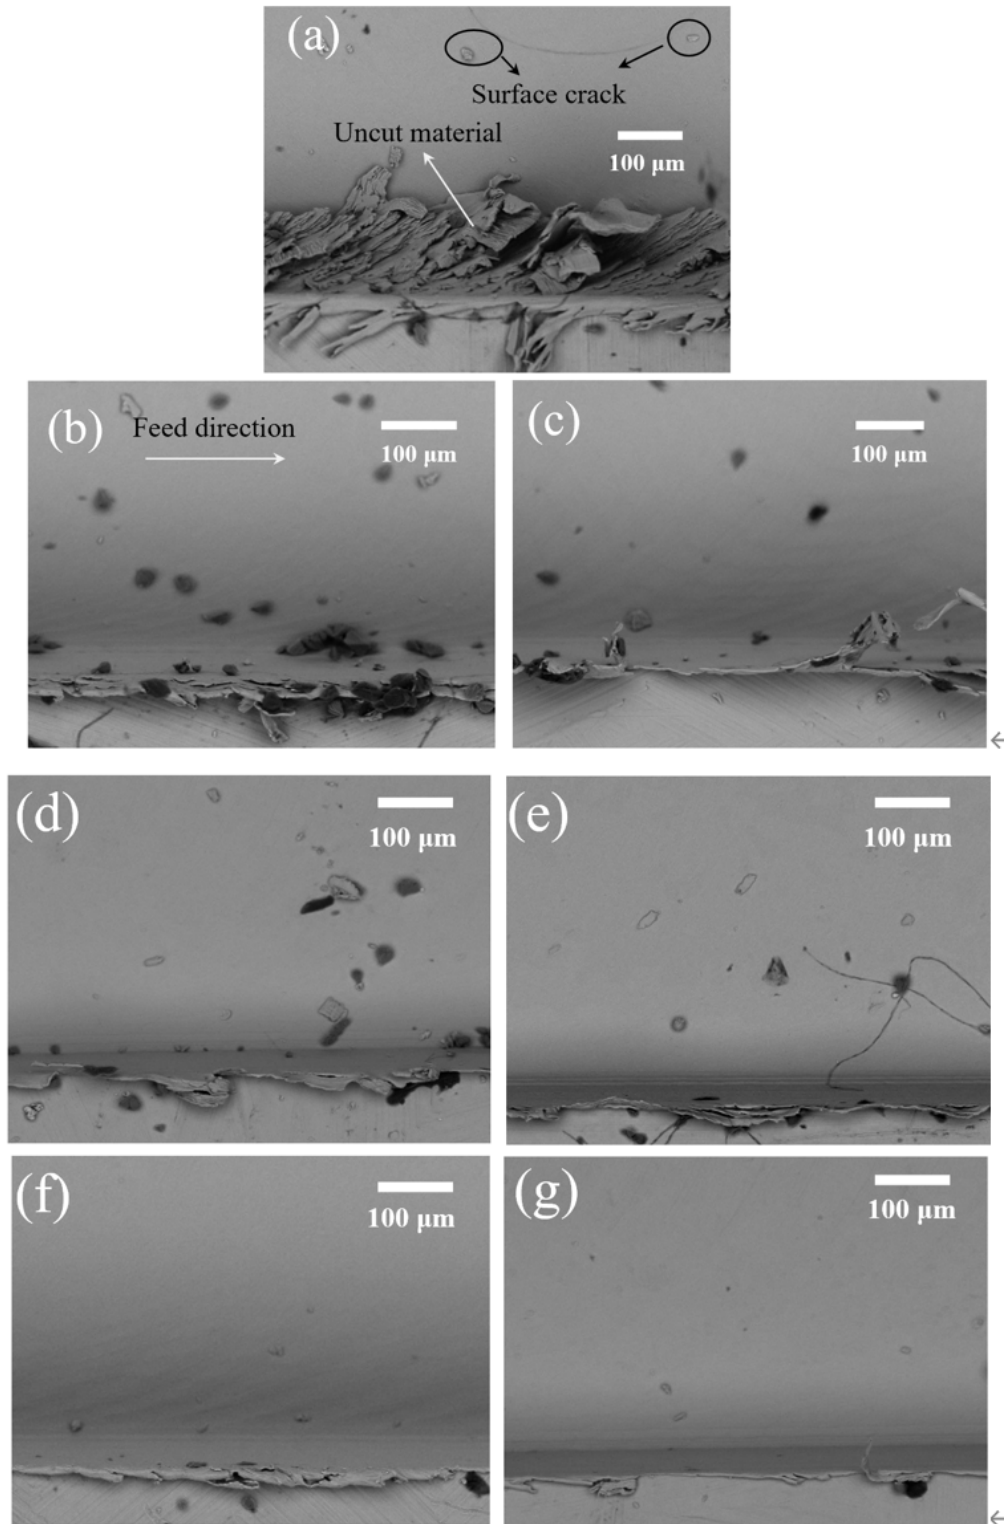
SEM measurement of burrs and the machined surface at the edge area of the up milling side of conventional micro milling and vibration assisted micro milling at the cutting length of 600mm. (a) Conventional micro milling; (b) Vibration amplitude 0.5  $\mu\text{m}$  and vibration frequency 1500Hz; (c) Vibration amplitude 1  $\mu\text{m}$  and vibration frequency 1500Hz; (d) Vibration amplitude 0.5  $\mu\text{m}$  and vibration frequency 3500Hz; (e) Vibration amplitude 1  $\mu\text{m}$  and vibration frequency 3500Hz; (f) Vibration amplitude 0.5  $\mu\text{m}$  and vibration frequency 5500Hz; (g) Vibration amplitude 1  $\mu\text{m}$  and vibration frequency 5500Hz;
